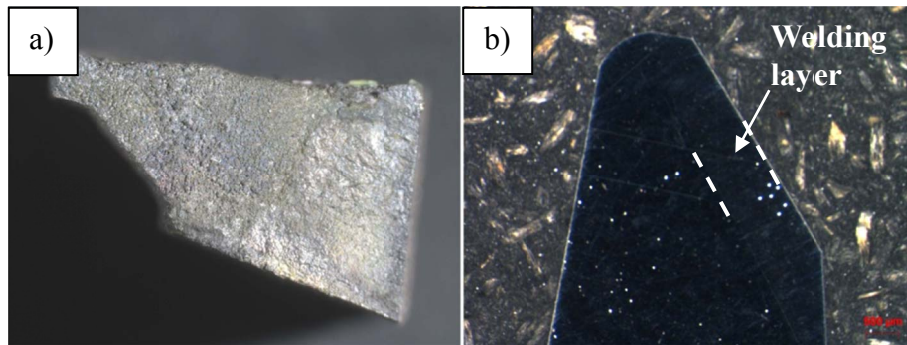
Cross section of valves, a) failed valve (No. 4) and b) new valve
